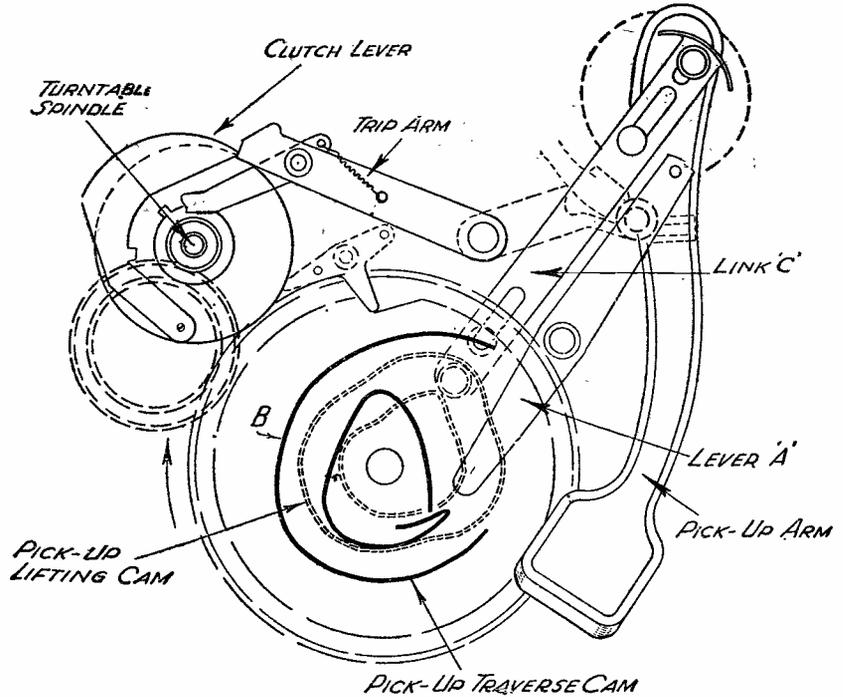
Simplified diagram of the H.M.V. unit showing clutch mechanism, gearing, and pick-up cams.
